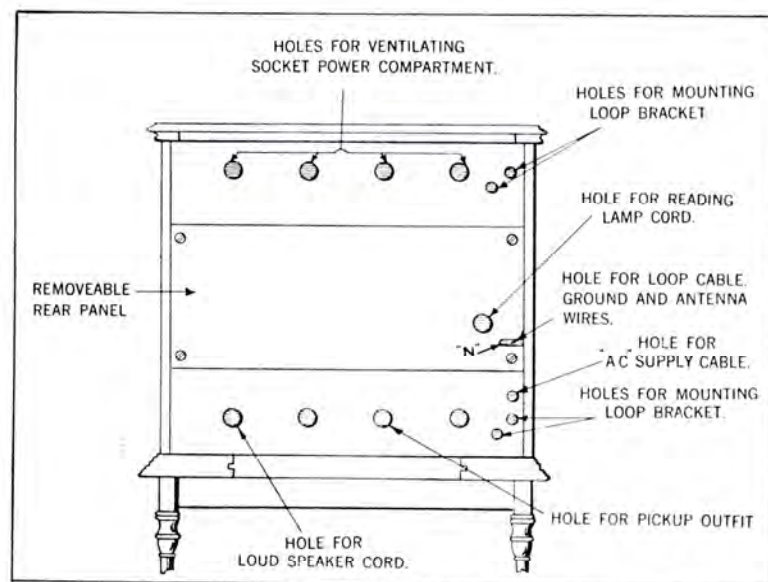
Rear View of Cabinet of No. 734 Receiver
